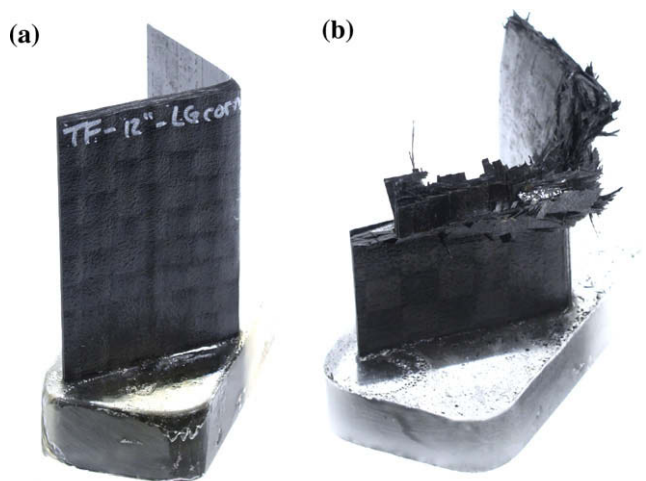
(a, b) Large corner element, specimen V, before and after crush testing.
